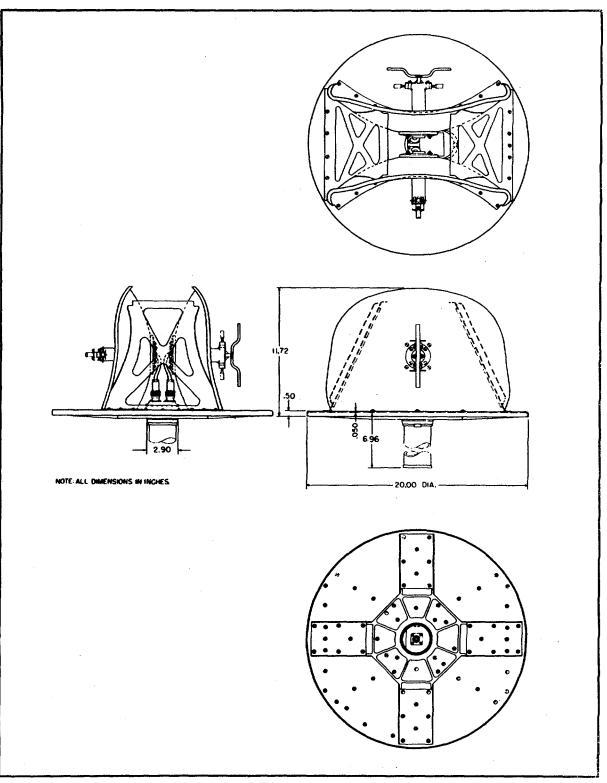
Antenna Assembly AS434/APA-9, Outline and Mounting Dimensions
